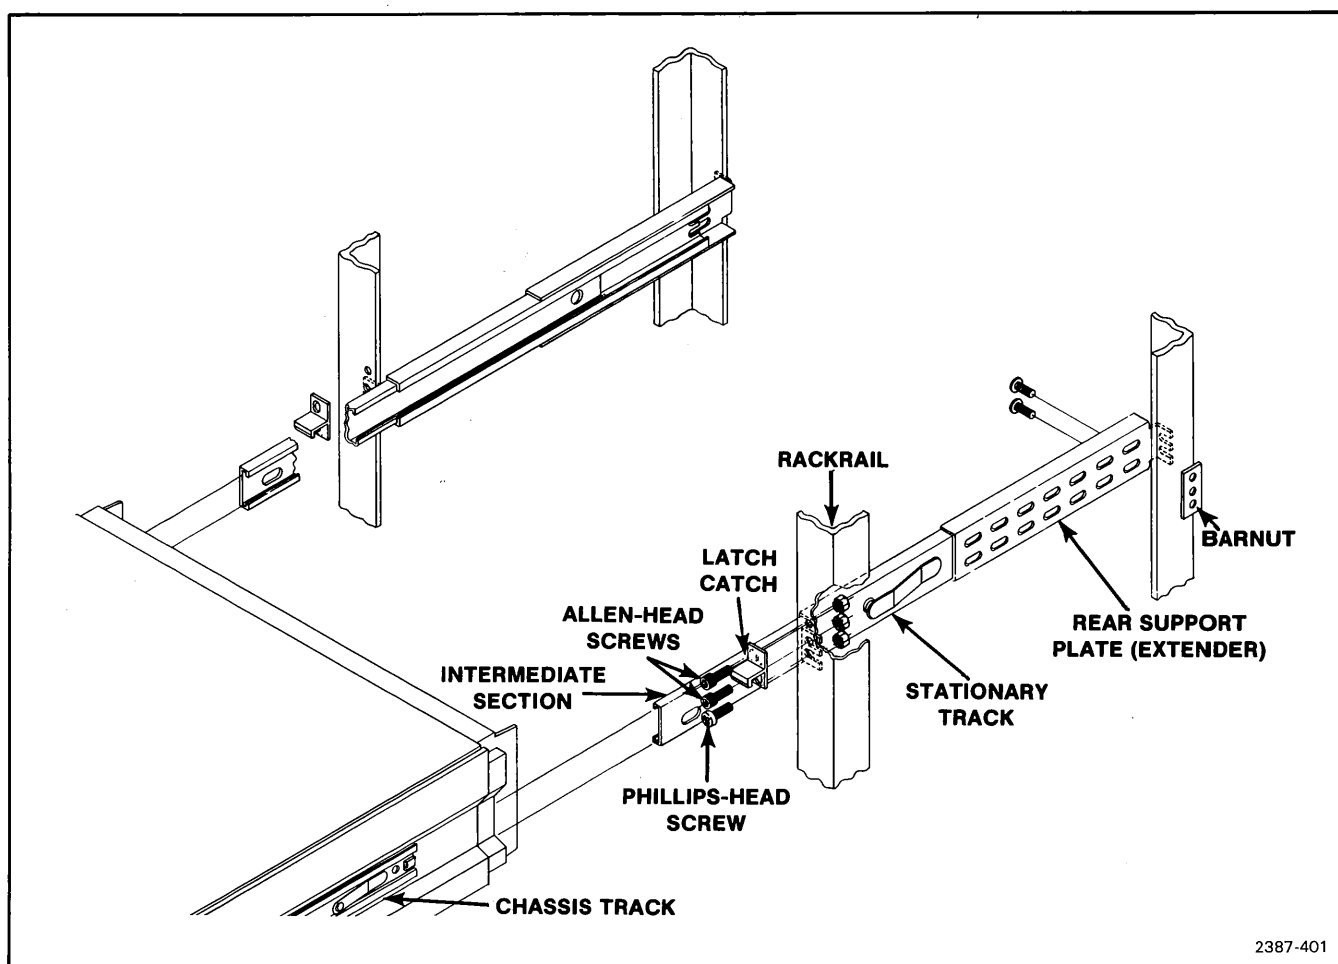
Assembling the 7612D rackmounting hardware.
